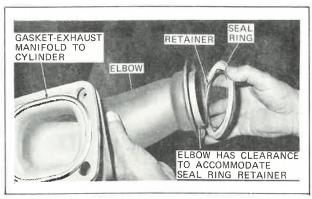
SEAL RING RETAINER CORRECTLY APPLIED.
